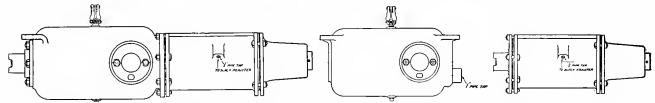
Freight Brake Cylinder, 8 in. by 12 in., and Fig. 1295—Freight Brake Cylinder, 8 in. by 12 in., with Auxiliary Reservoir Combined. Auxiliary Reservoir Detached.
